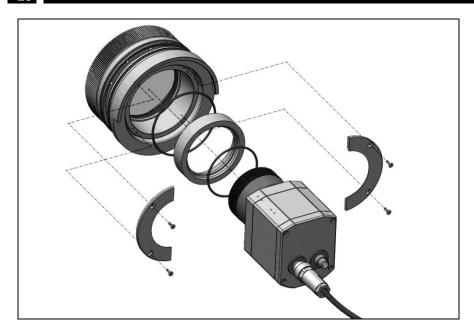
Assembling of the 6°, 23°, 33°, 38°, 41°, 62° and 72° optics
